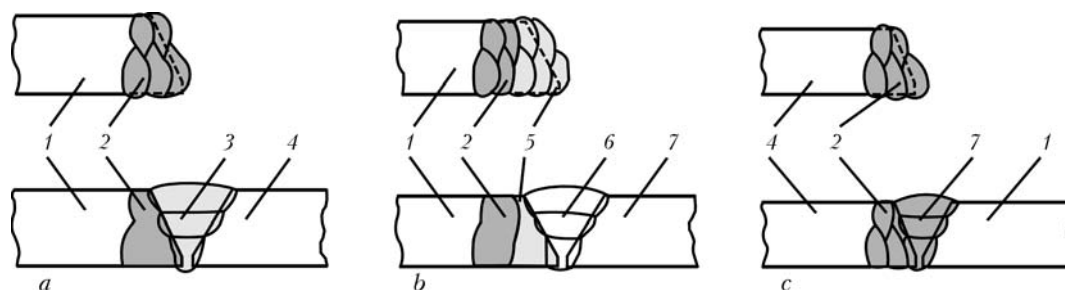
Schemes of first (a), second (b) and third (c) technologic variants of welded joints of dissimilar steels: 1 — base metal (steel 20); 2 — hard-facing of Armco-iron; 3 — weld made using filler metal Sv-10Kh16N25AM6; 4 — base metal (steel 08Kh18N10T); 5 — hard-facing of filler metal Sv-10Kh16N25AM6; 6 — weld made using filler metal Sv-04Kh19N11M3; 7 — weld made using Armco-iron as a filler metal
